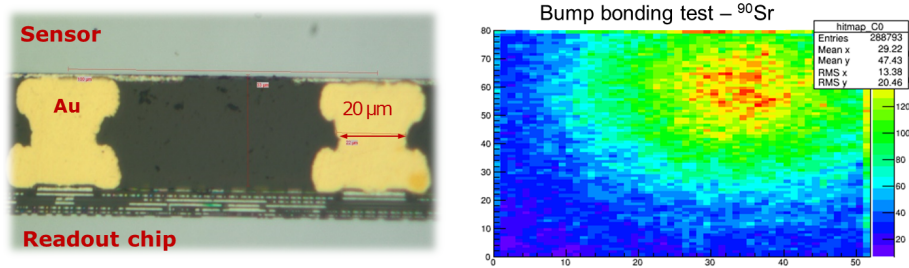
Cross-section of a bump-bonding assembly using the gold-stud bump-bonding technology (left) and an electrical test with a ^{90}Sr source.
